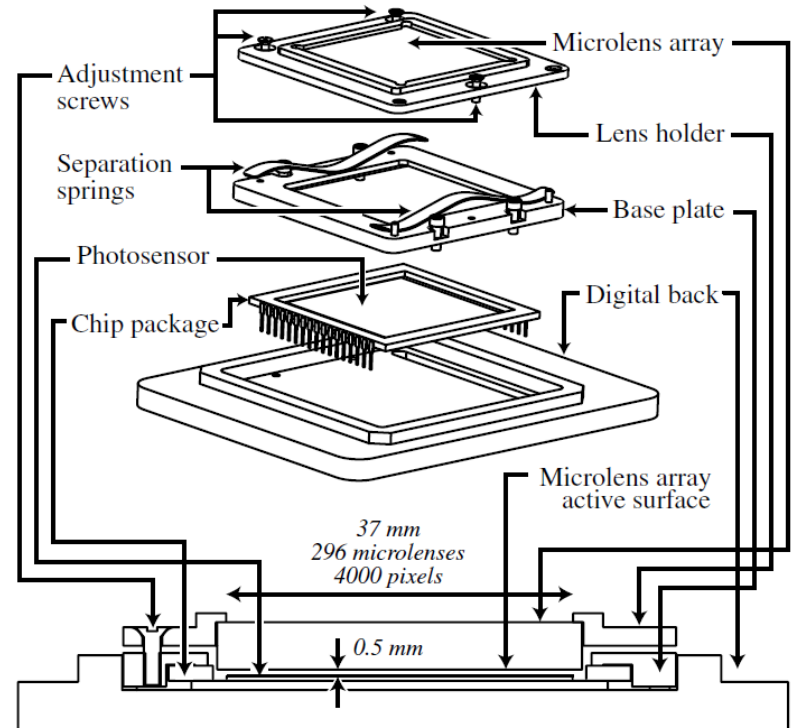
Top: Exploded view of assembly for attaching the microlens array to the digital back. Bottom: Cross-section through assembled parts.
